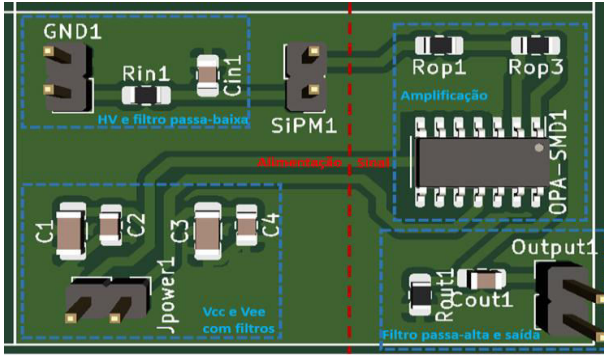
Design of amplification PCB using SMD component and separation in layout.
